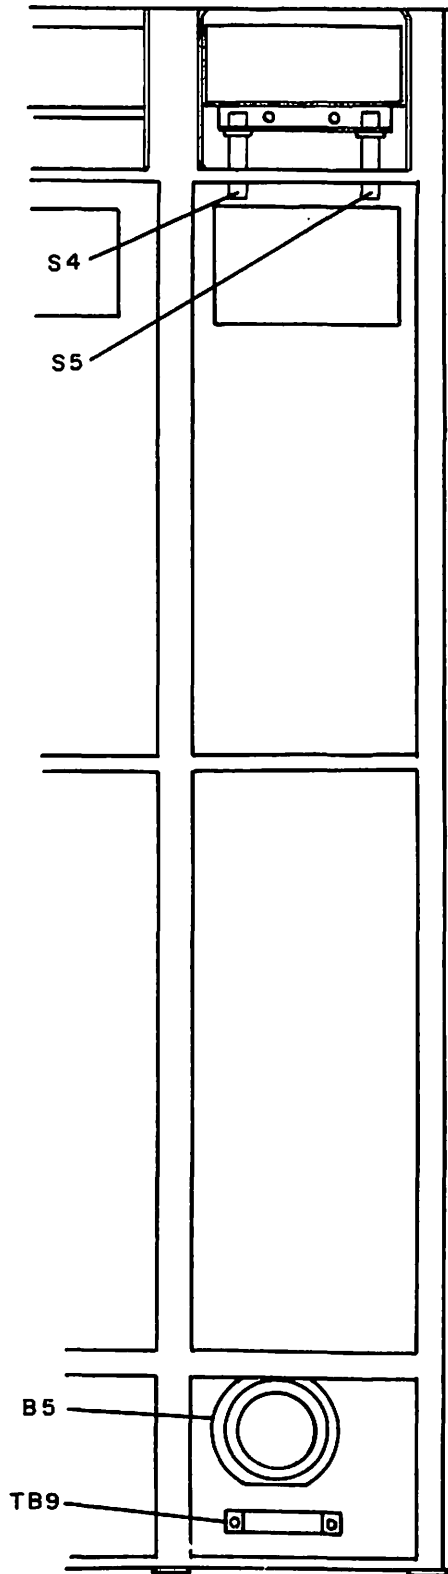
Magnetic Tape Control Section, Water Cooled, Interior View
